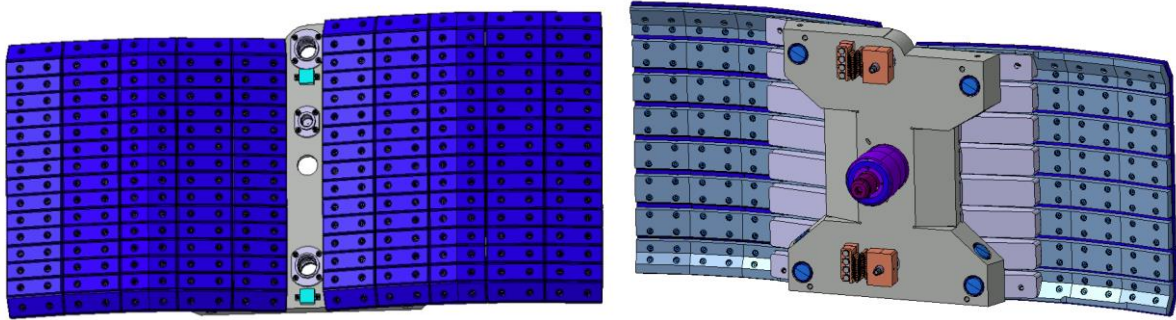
Detailed Model of Temporary First Wall 09 panel.
